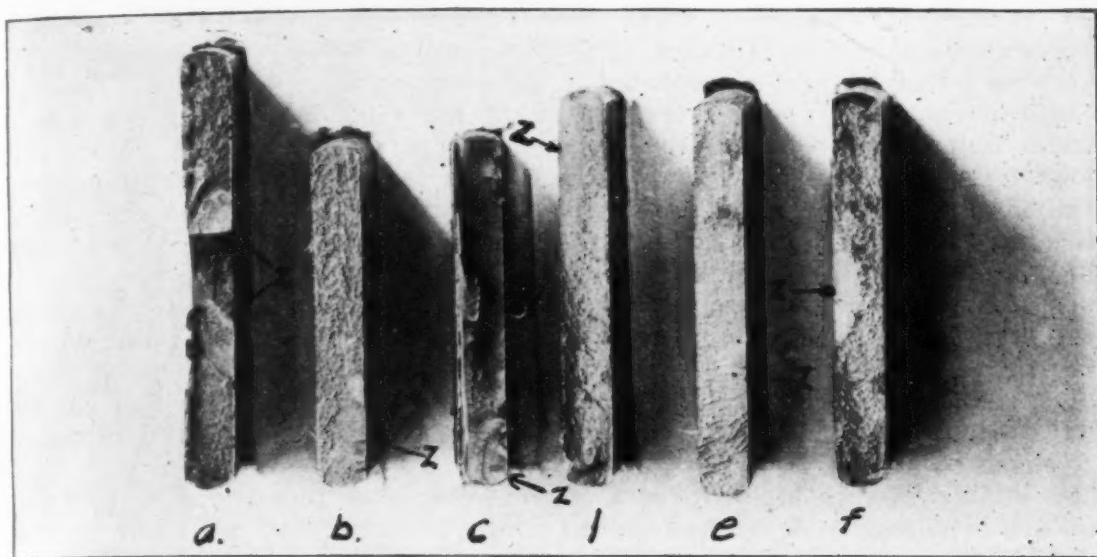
Fatigue Fractures of Specimens Shown in Fig. 1. (a) Leaf Spring Which Failed in Service Showing Fracture through Center-Bolt Hole. (b) Carbon Steel Spring Which Failed through Fatigue in Spring Vibratory Machine. (c) Chrome-Vanadium Spring Which Failed After Six Months' Service. (d) Silico-Manganese Spring Steel After Failure in Laboratory Test for Fatigue Strength. (e) and (f) Carbon Spring Steel After Failure in Laboratory Test for Fatigue Strength
